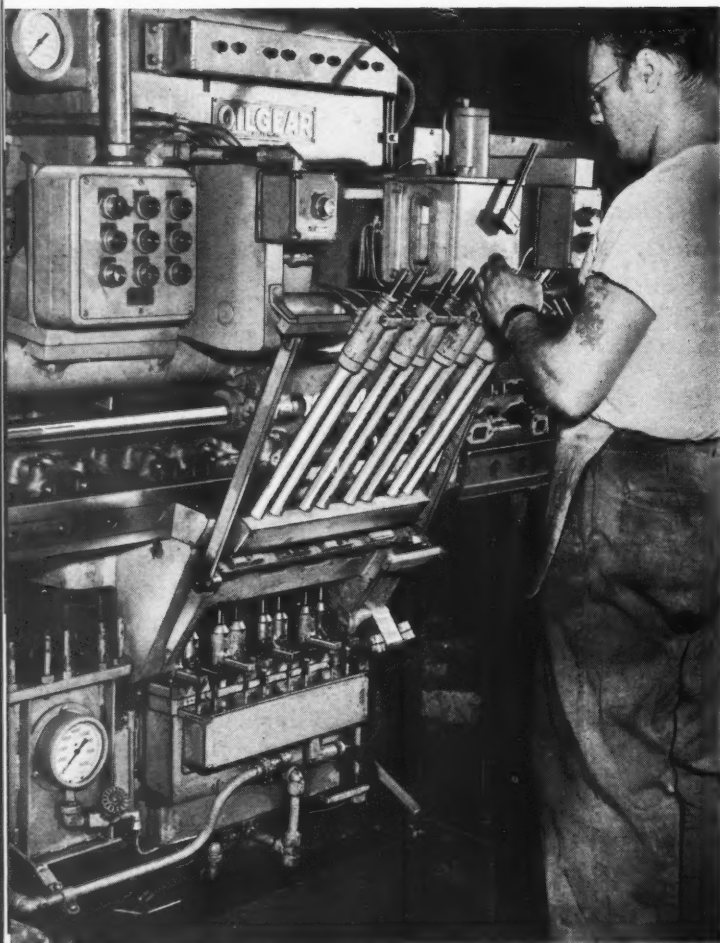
(Below) Same machine shown in Fig. 4, but with the fixture elevated for pushing the bushings into the cylinder-head holes
